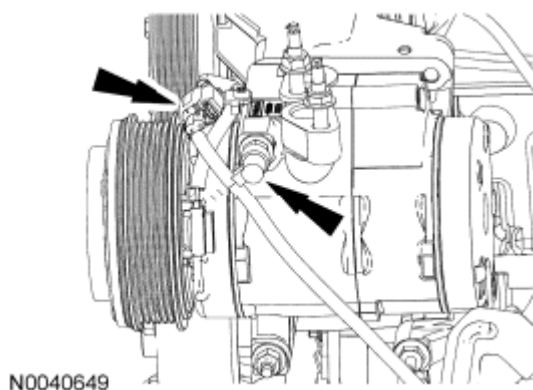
Locating A/C Compressor Electrical Connector And Wire Harness Retainer
